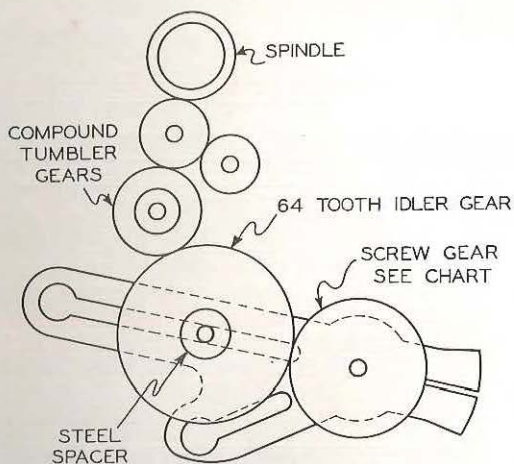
Gear set-up for 18 through 32 threads per inch.
